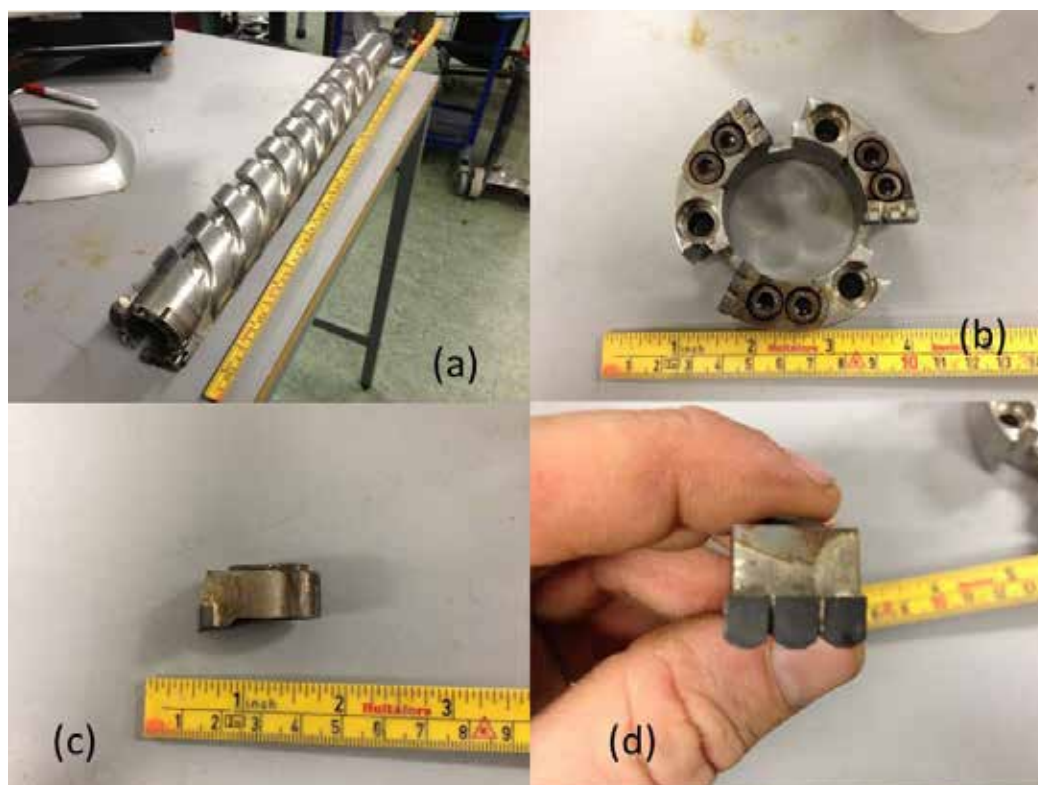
Permafrost corer (a) assembled (b) drill bit (c) cutting tool (d) poly-crystalline diamond composite inserts
